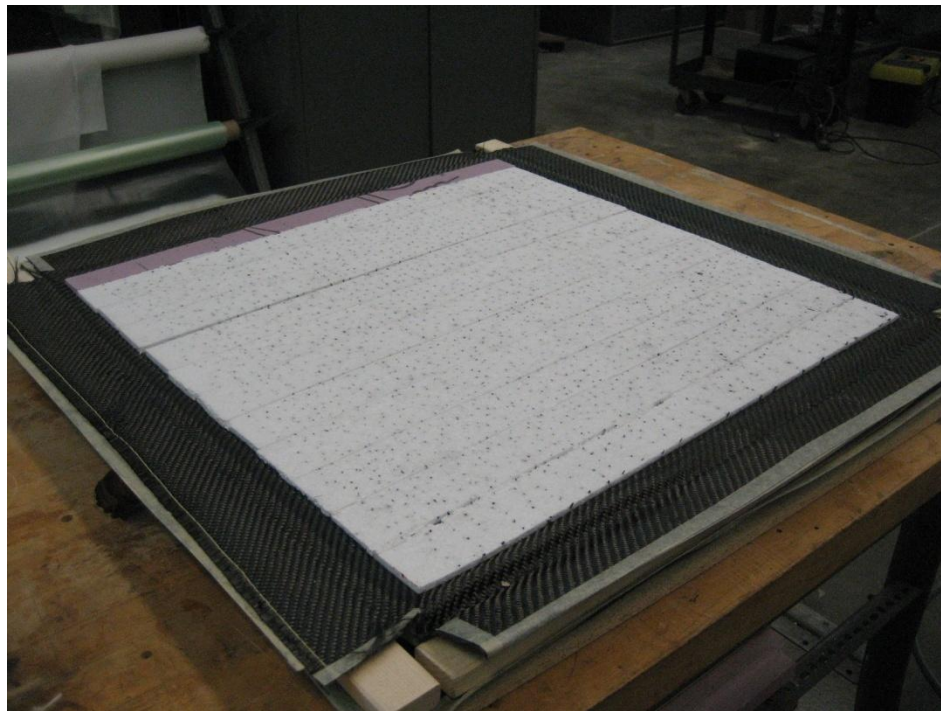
TCS panel fixture – showing bottom catcher polystyrene foam – after the pins are inserted
